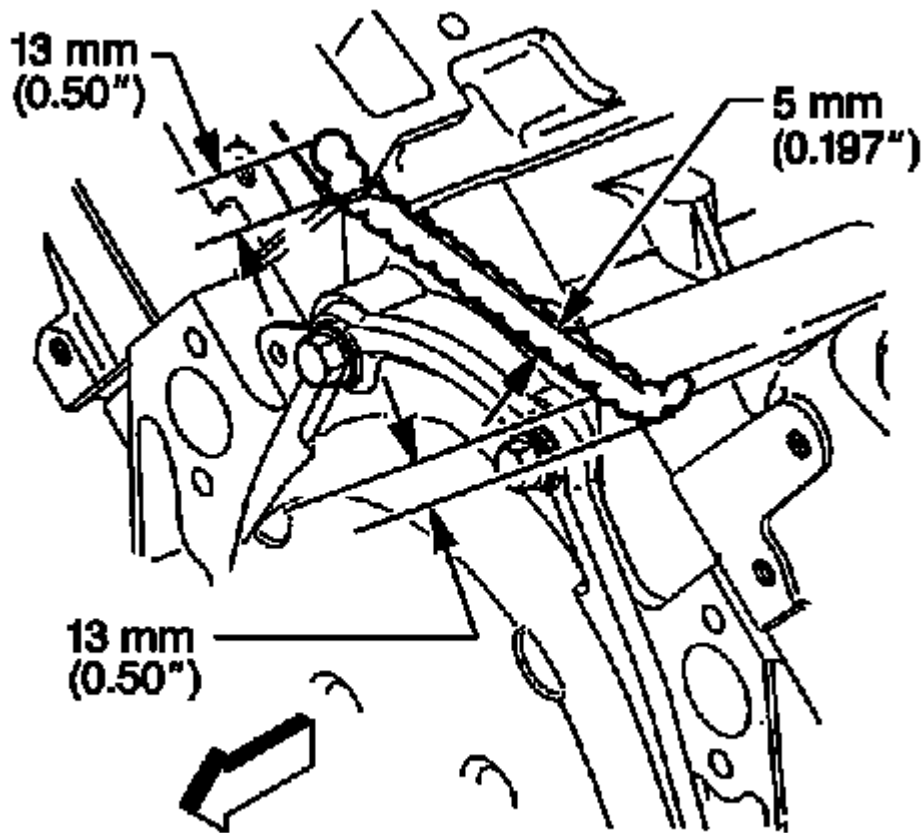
Applying Adhesive To Front Top Of Engine Block
